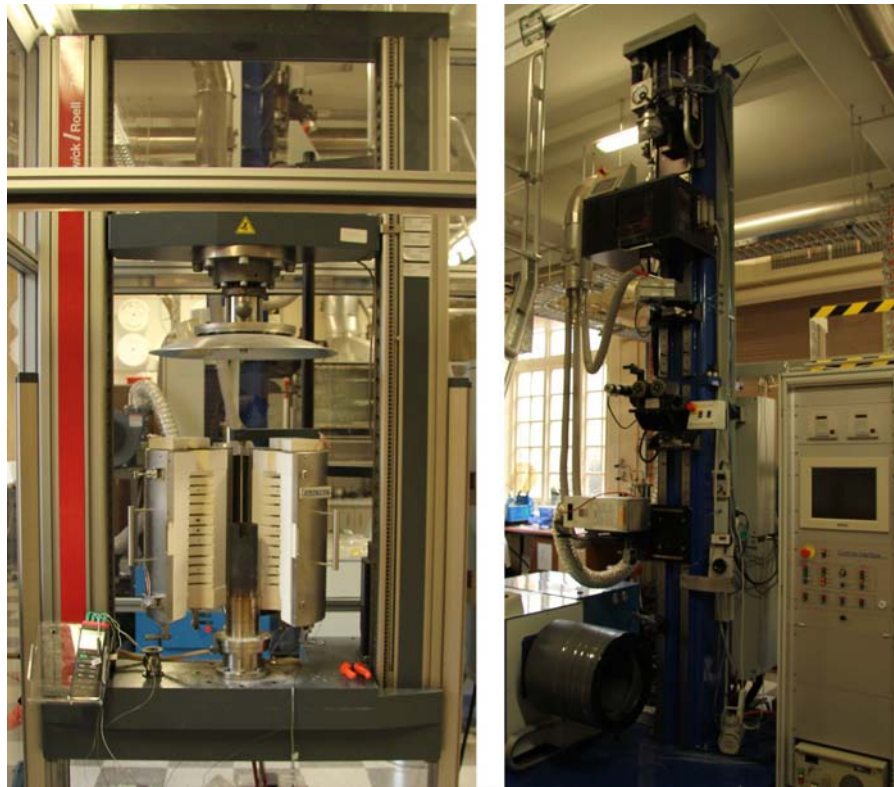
Fabrication machinery (left) Extrusion machine (right) Drawing tower.
